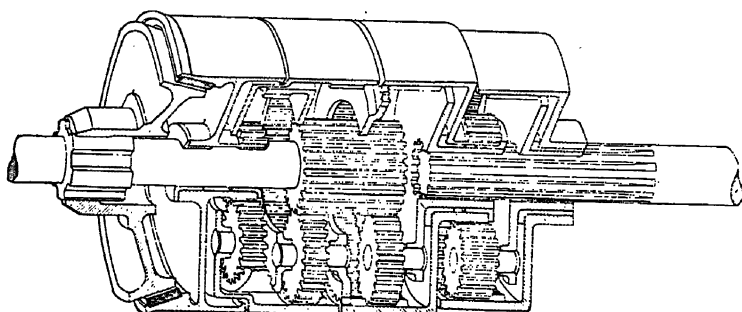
A Pictorial View of the Wilson Pre-Selective Gearbox.
